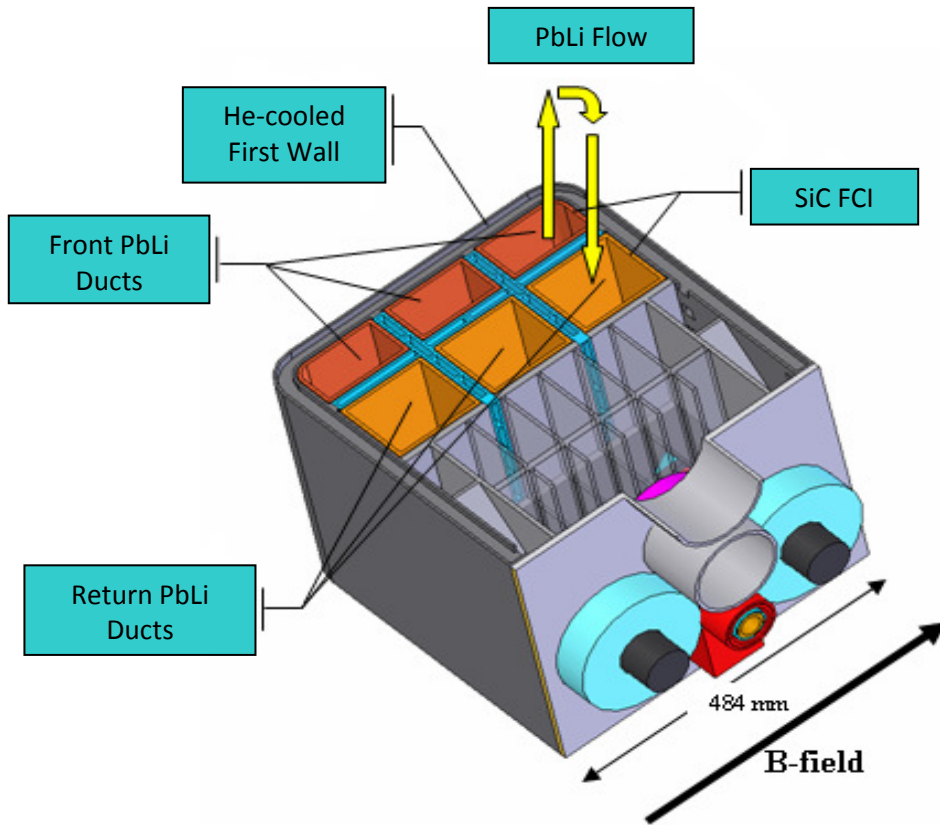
Sketch of the US ITER DCLL Test Blanket Module.
